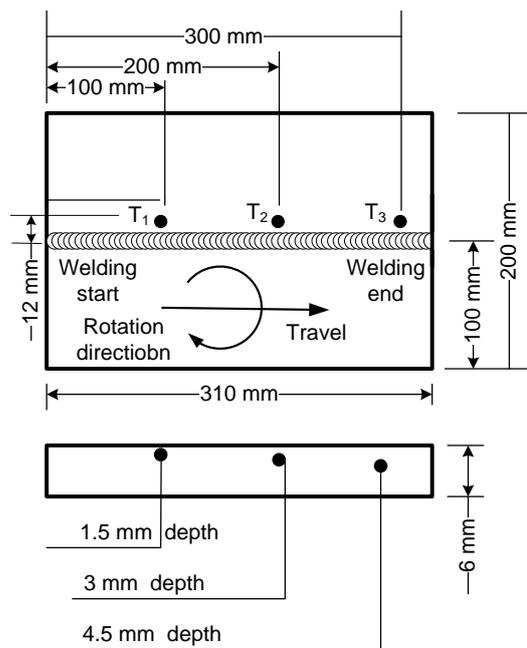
Dimensions of the AA6061- T651 aluminum alloy square butt joints used for welding processes. Showing the location of temperature measurements
